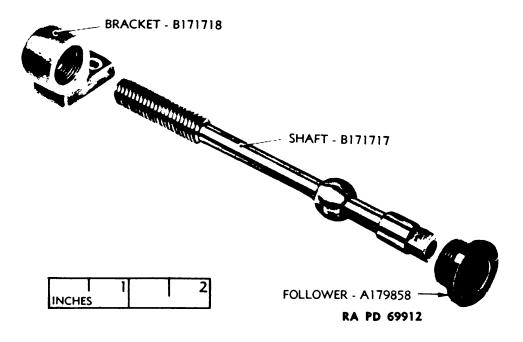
Interpupillary Adjusting Shaft — Exploded
